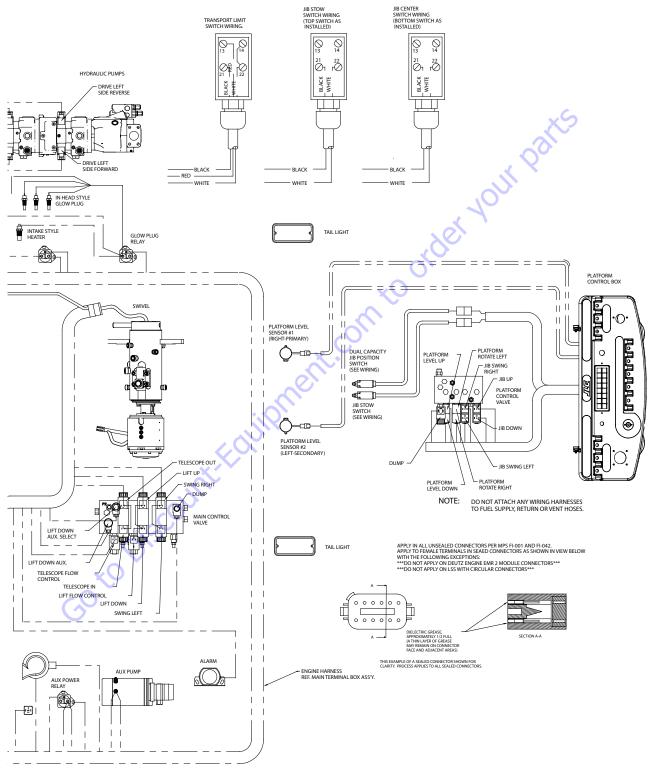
Turntable Electrical Components - Sheet 2 of 2
